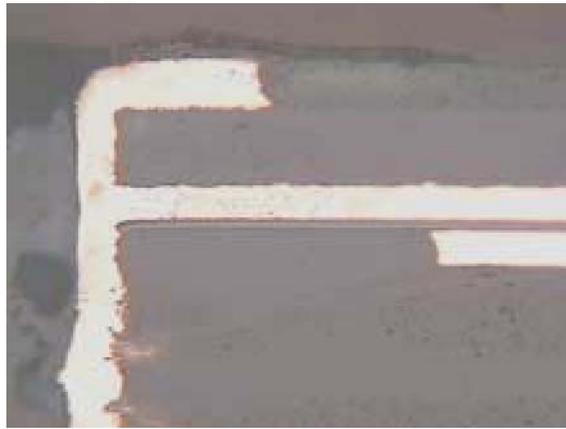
Cross-Section of 24 Layer Board Using 12 μm Capacitance Layer after 6x Solder Shock
